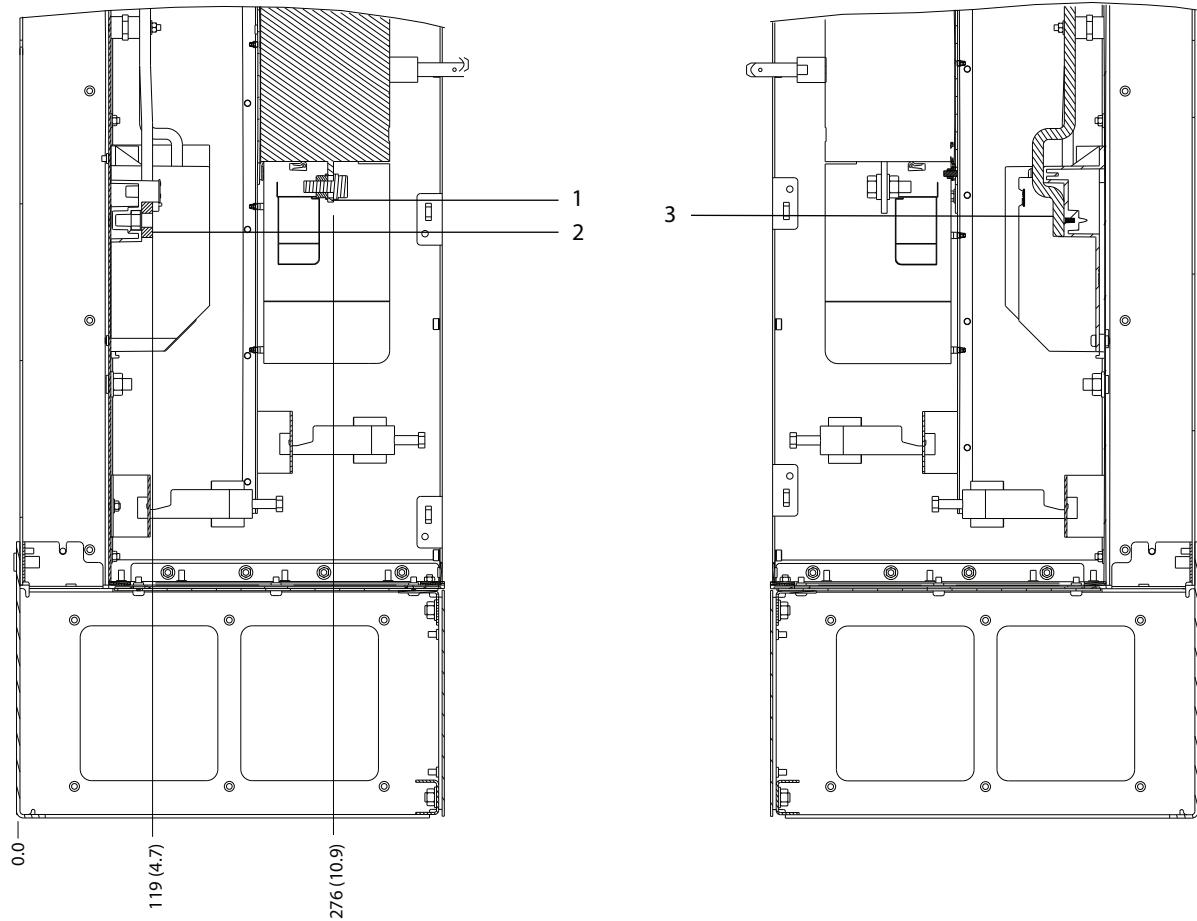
D6h Terminal Dimensions with Circuit Breaker Option (Side Views)
